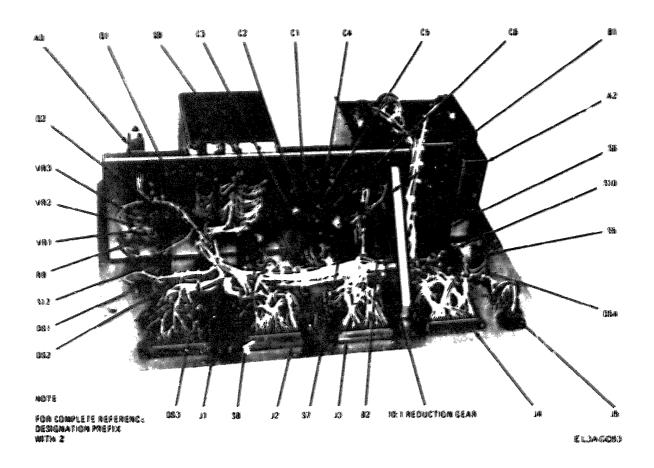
Test Set Subassembly MX-8639A/APD-94D, Unit 2 rear chassis new, parts location
